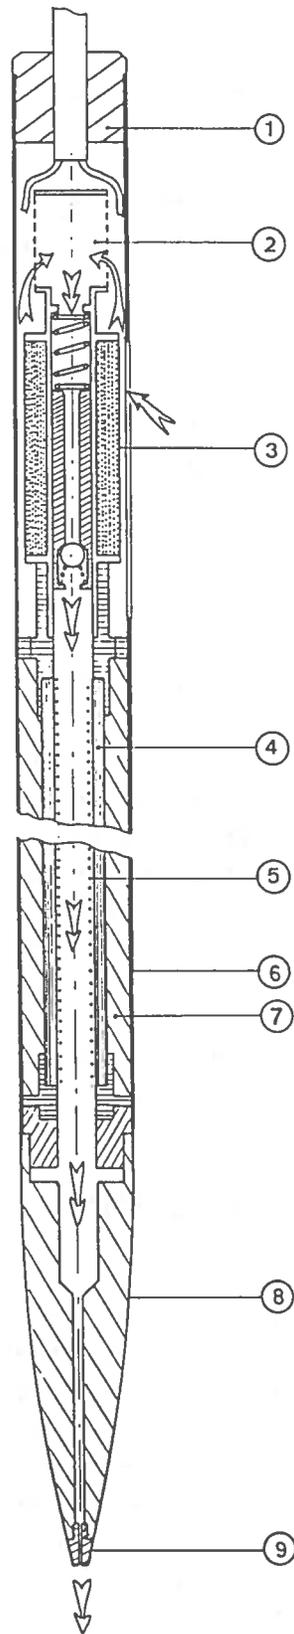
Schematic diagram of the Electrochaude drill : (1) Cable anchorage ; (2) Filter ; (3) Electromagnetic pump ; (4) Ceramic tube ; (5) Heating wire ; (6) Stainless steel external tube ; (7) Weight ; (8) Nozzle ; (9) Tip.
